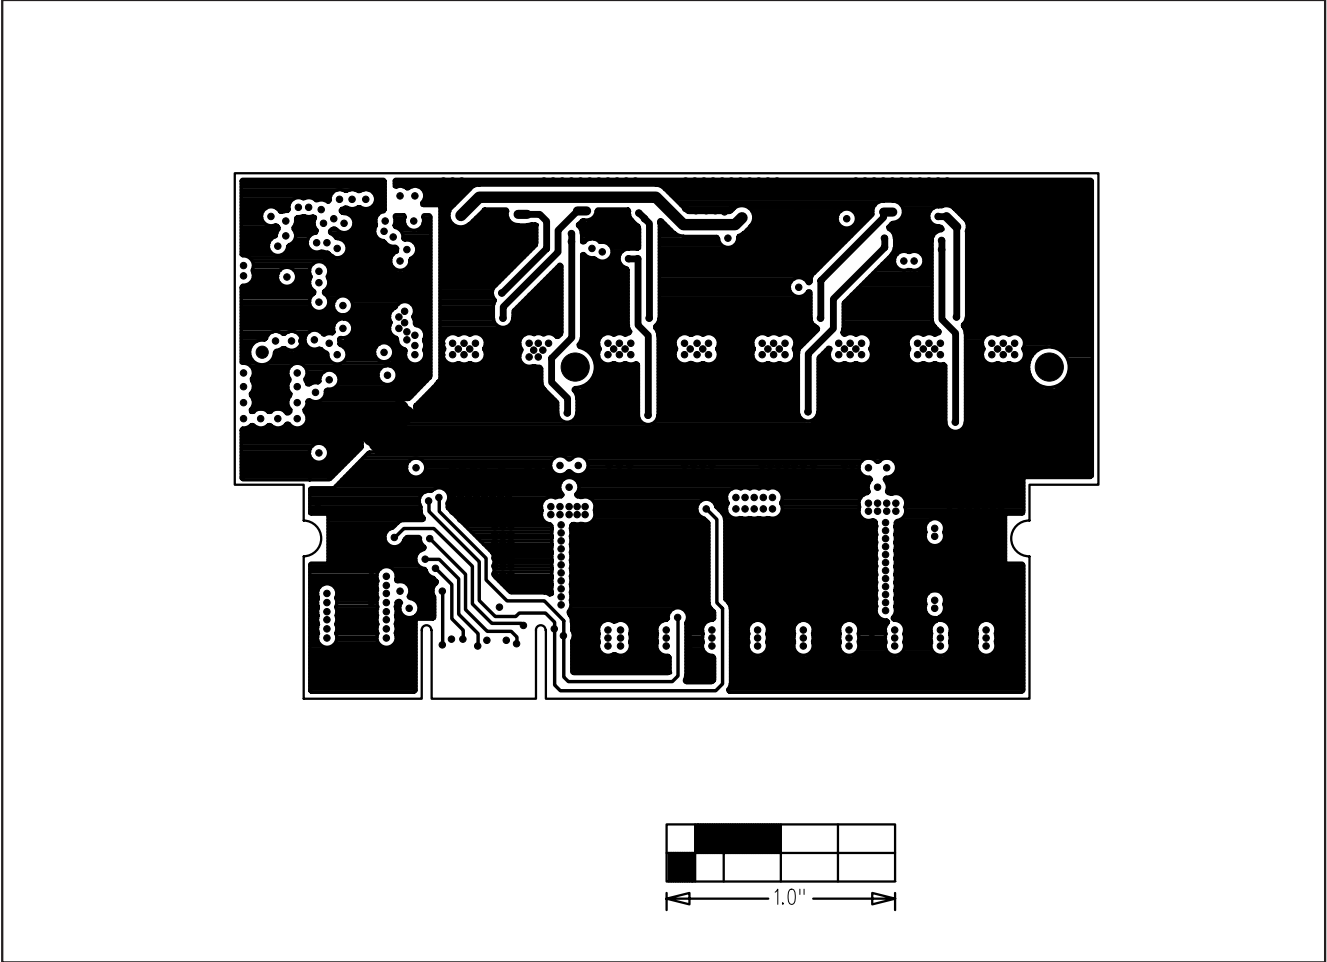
MAX8525 EV Kit PC Board Layout—GND Layer 2
